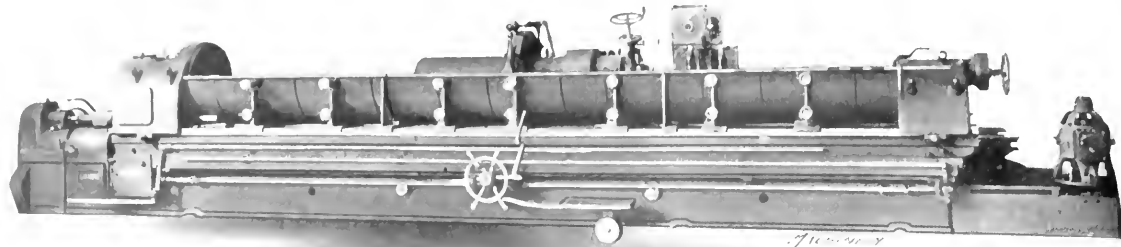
Front View of Landis Motor-driven Plain Grinding Machine
